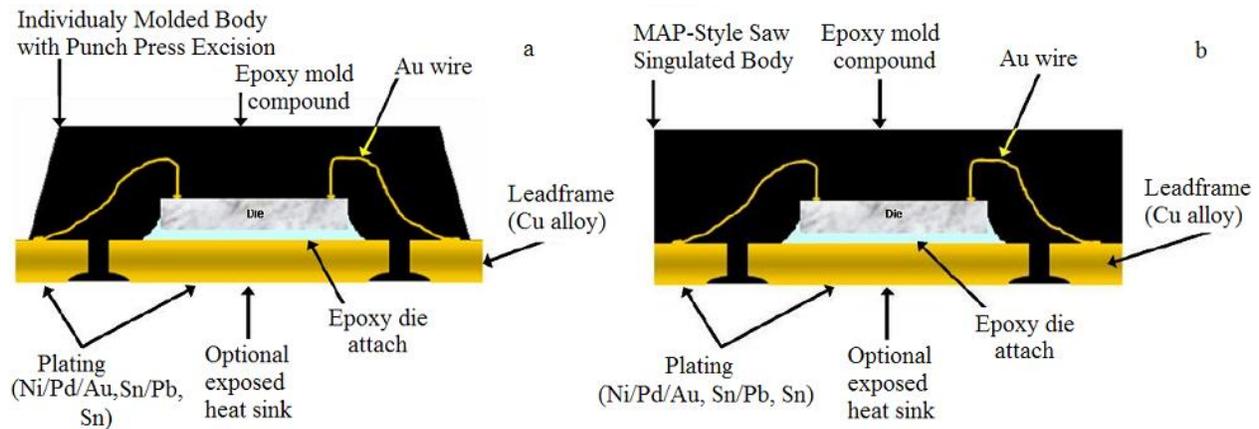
Cross section view of: a) Punch QFN, b) Saw QFN
